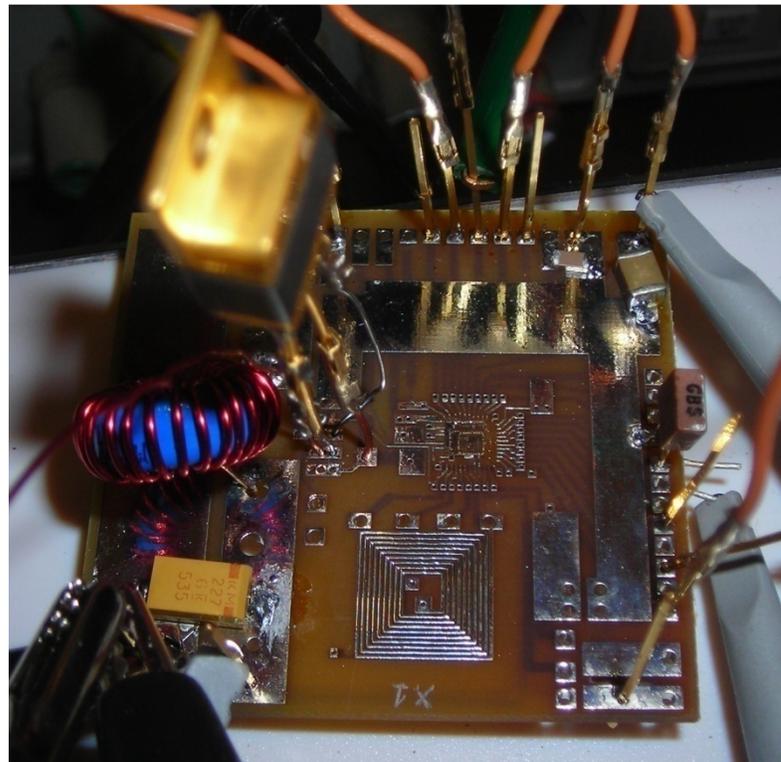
SMPS prototype using integrated gate drive transformer.
